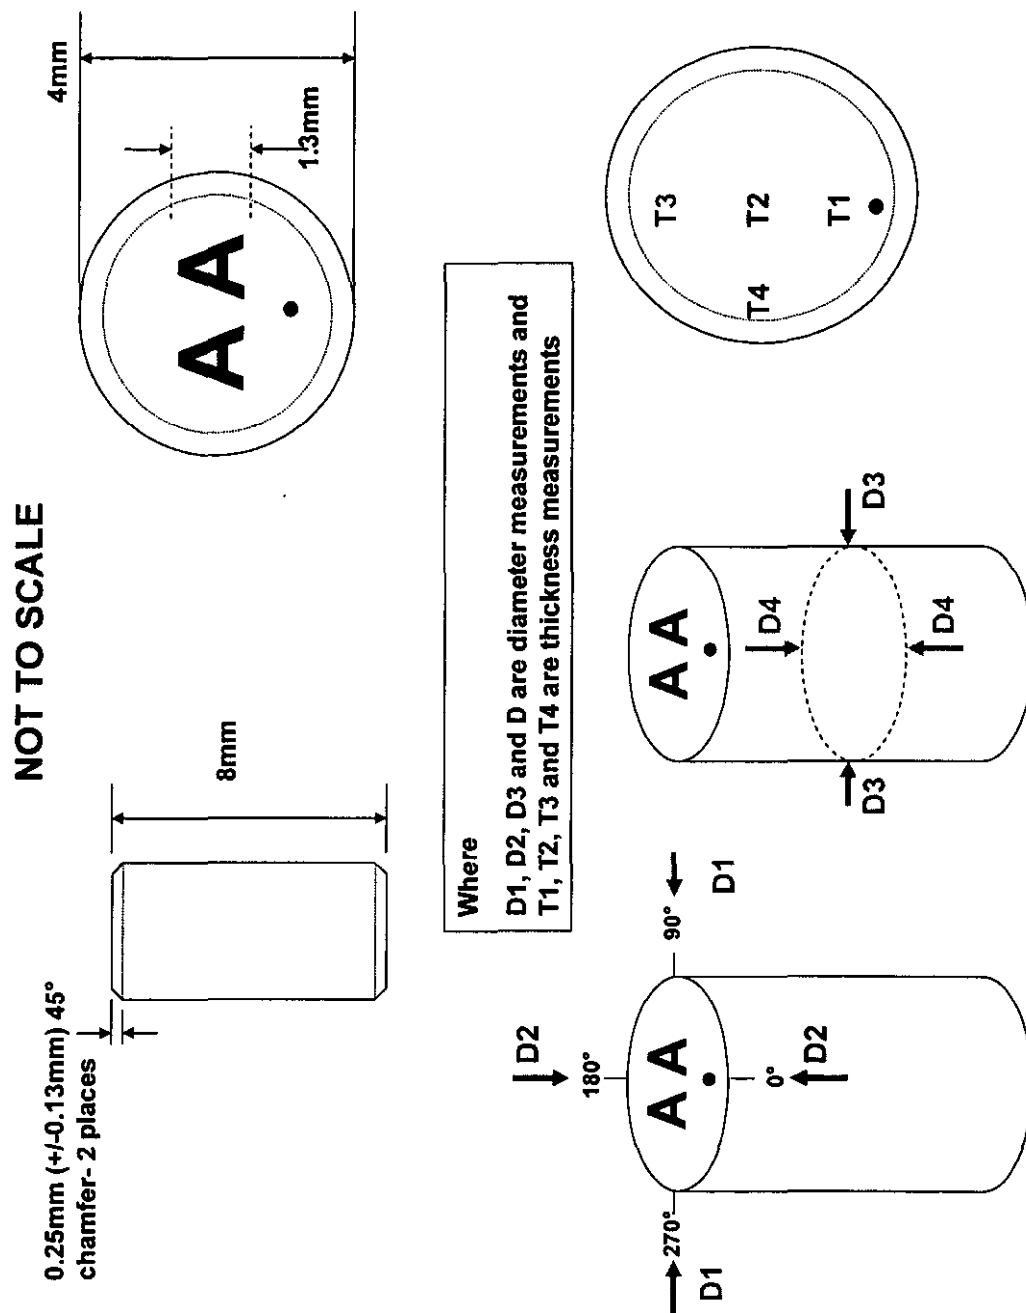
Sketch BeO-K-2:BeO Cylinders. [BCP Visual Defect Criteria Level 1 (Rev. E: August 2001), and Machine Dimensional Tolerances Class 2 (Rev. E: August 2001)]
